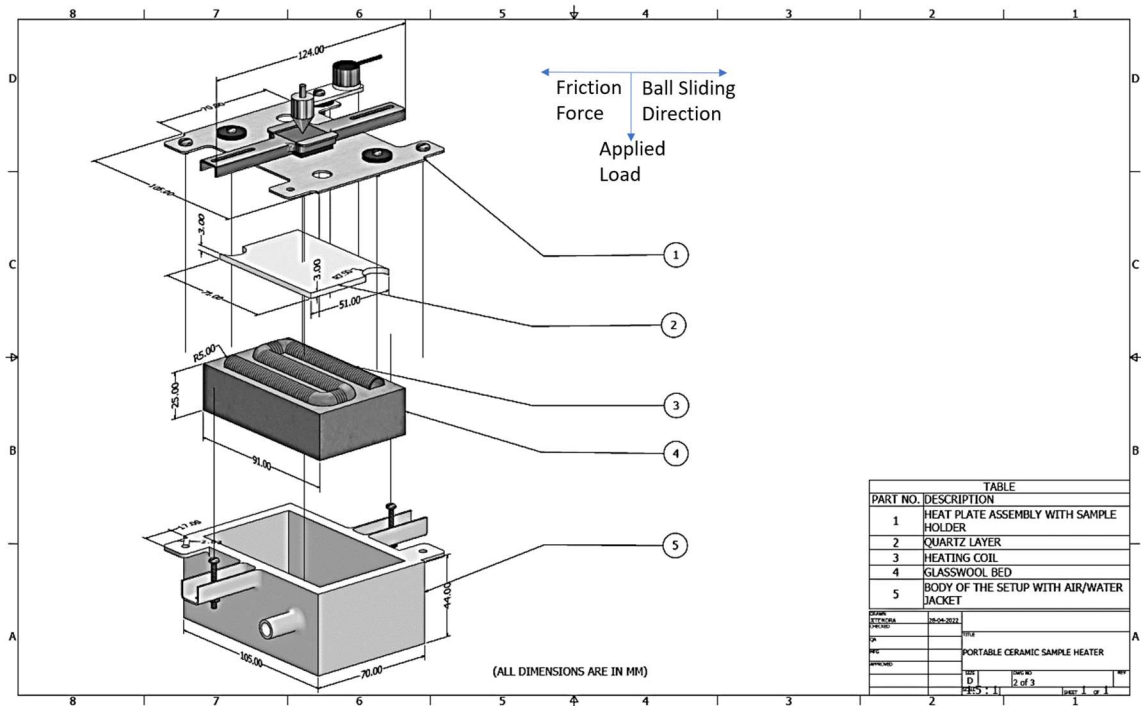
Exploded view showing the arrangement of Air/water jacket, glass wool bed, heating coil, quartz layer and heat plate with sample holder assembly
